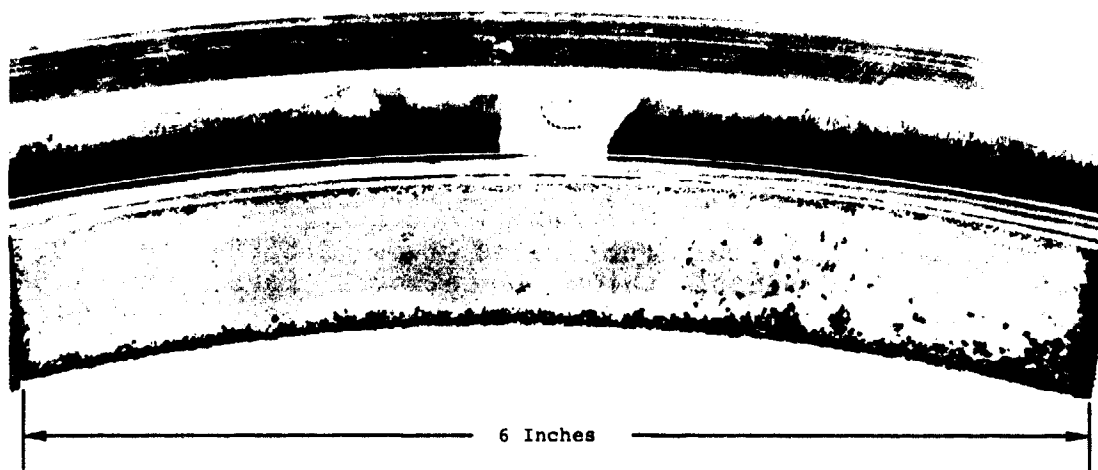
Appearance of the Metco P443-10 (Open Structure) High-Pressure Turbine Shroud Segment After 25 Hours of the Second Interim Engine Test, Build 3. (Turbine Rotor Blades Did Not Contact Shroud Surface)
